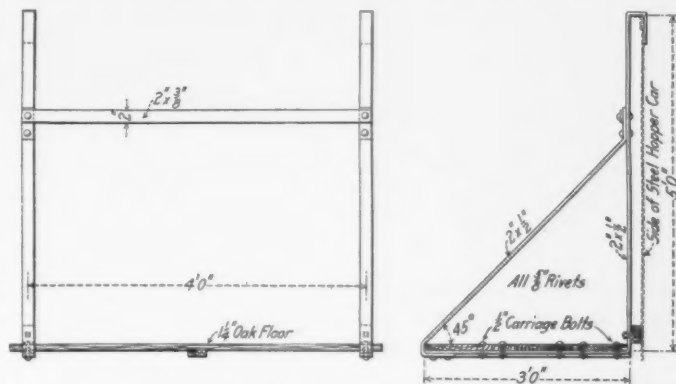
Riveting Platform for Sides of Steel Hopper Cars.
